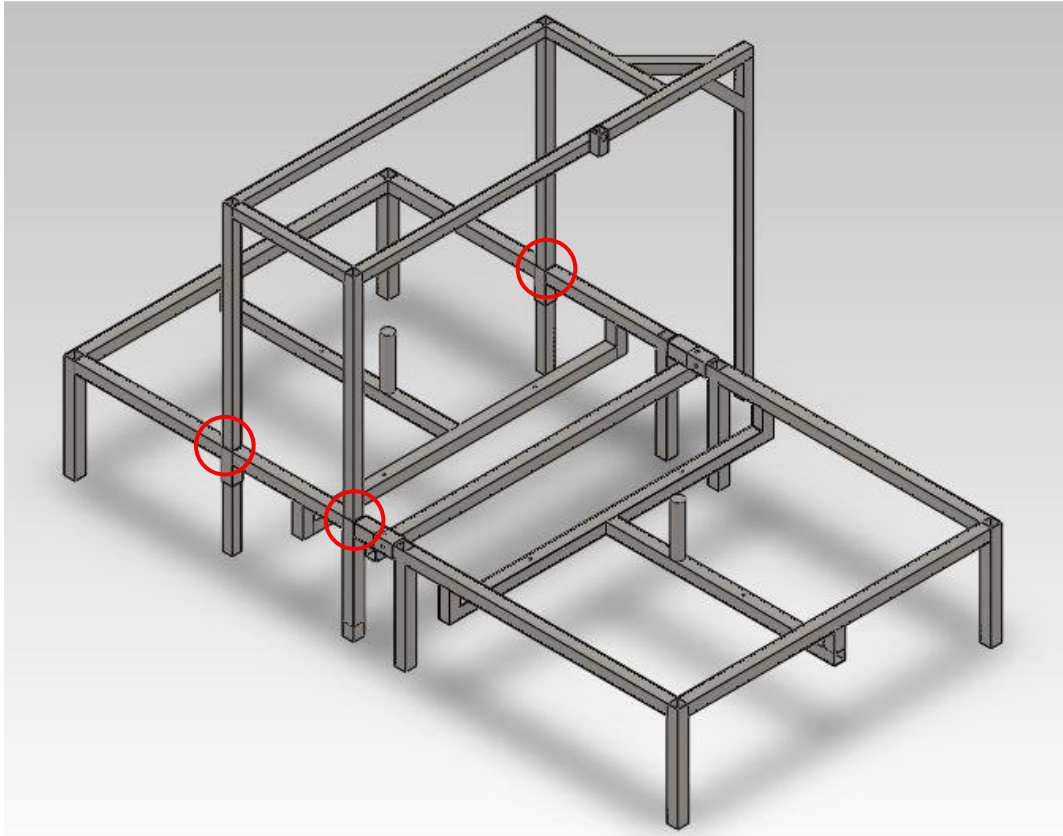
Figure showing how the upper frame integrates with the lower frame. The extended leg is supported by several 45 degree gusseting tubes. The extended leg is necessary to not interfere with weights on the weight assembly or the slider.
